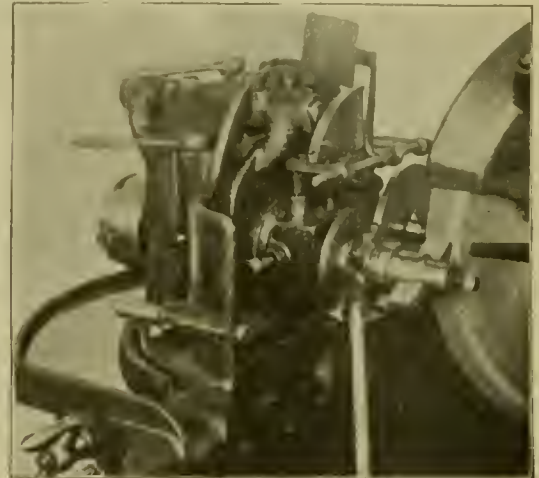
ATTACHMENT FOR GRINDING BORING CUTTERS WITH CORRECT AND UNIFORM CLEARANCE.
